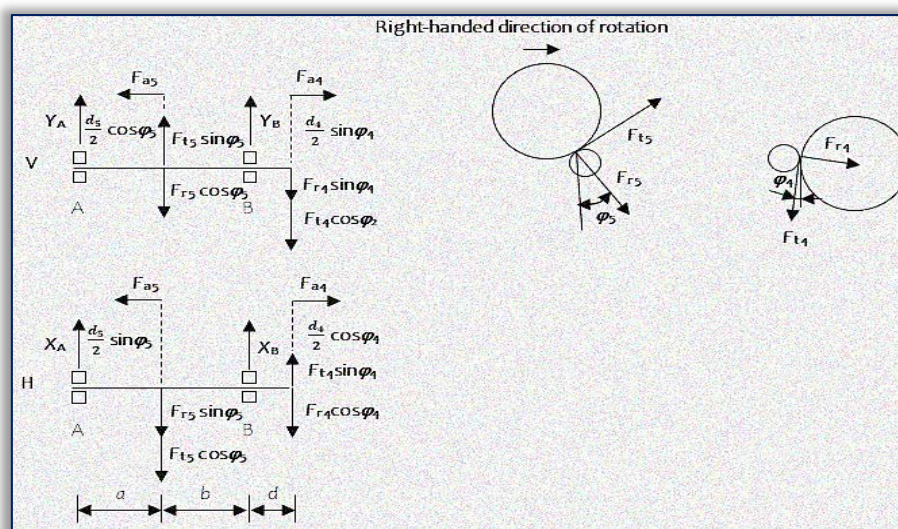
Analysis of forces on the fifth gear shaft for a three-stage gearbox in case the axial forces are overridden, i.e. there are two sets of output gears (right-handed direction of rotation of the output shaft)
